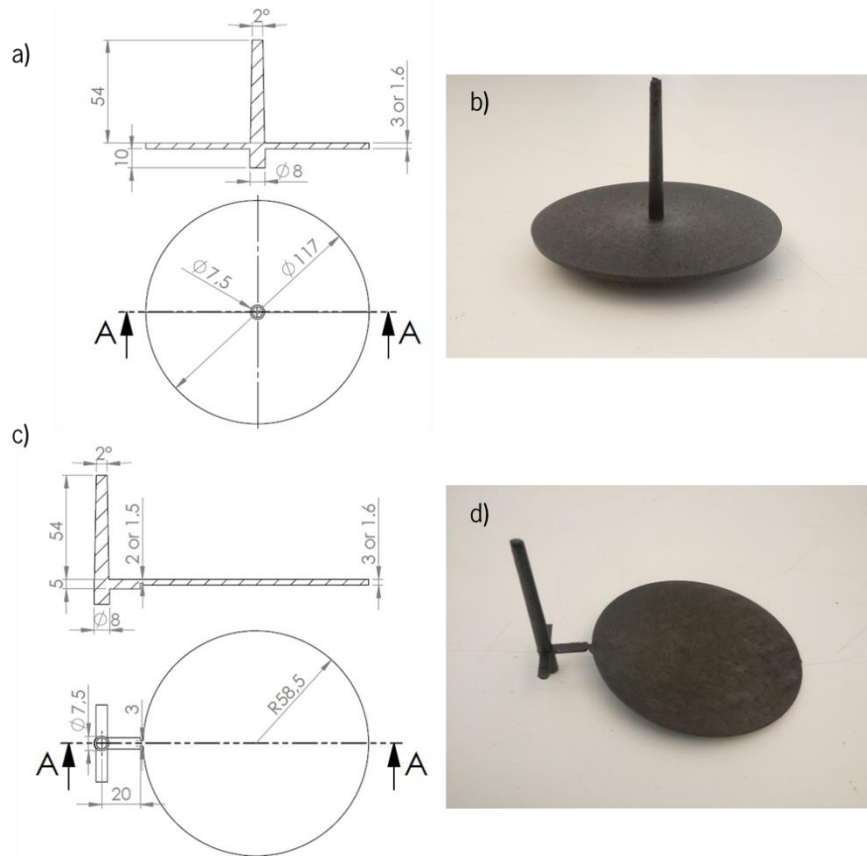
Injection moulding samples: a) and b) sprue gate; c) and d) side edge gate.
